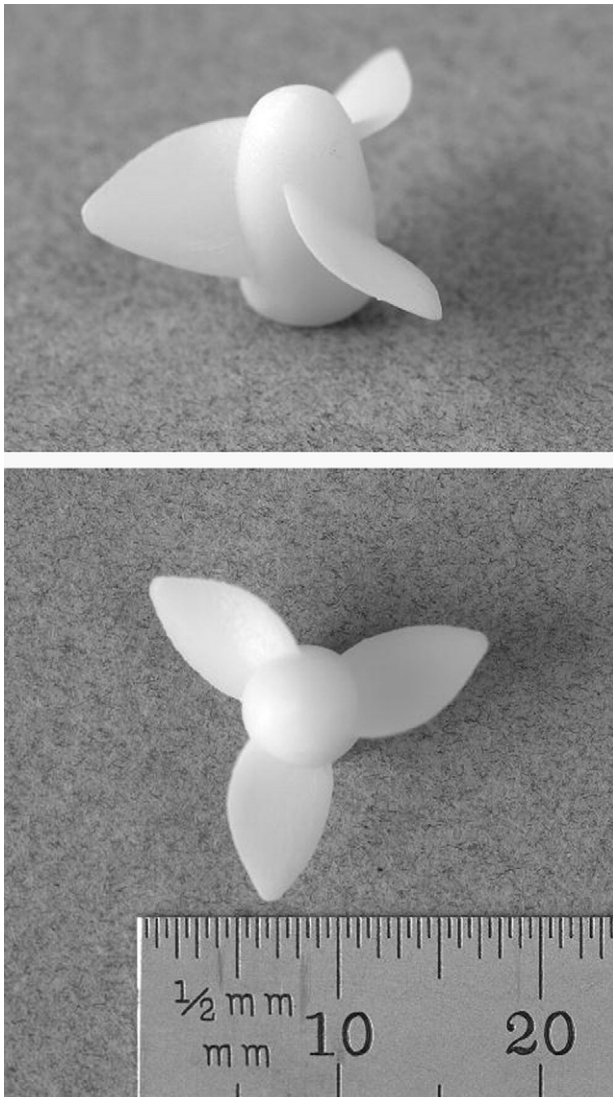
(Top) Plastic propeller prototype. (Bottom) Shows size.
